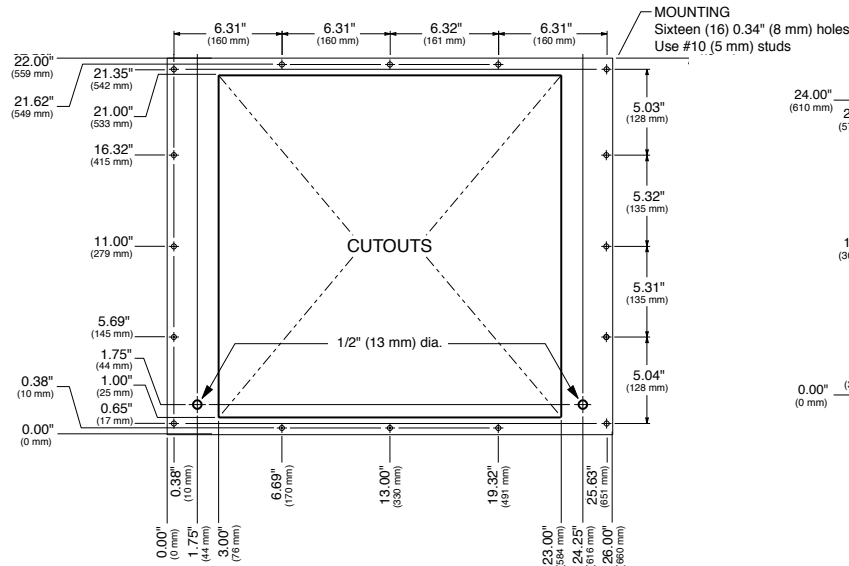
Form 22X Mounting Dimensions (1230 Drive)
